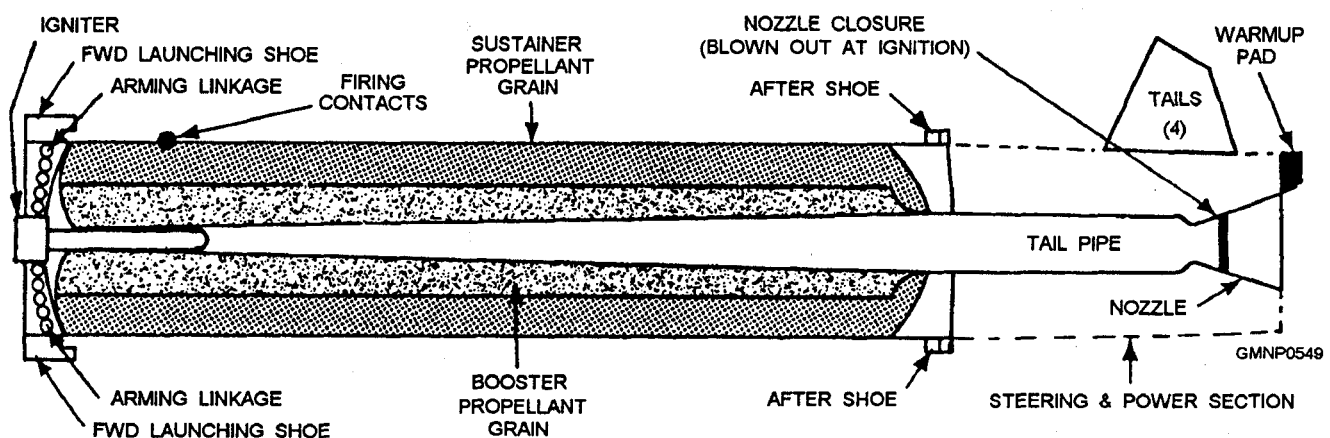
Cutaway view of a dual-thrust rocket motor.
